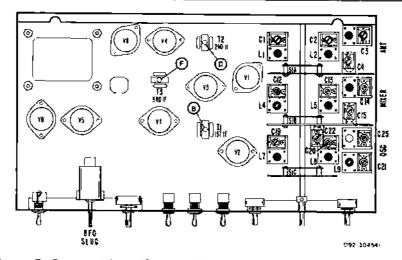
Bottom View Chassis Tube Locations and Alignment Points.
